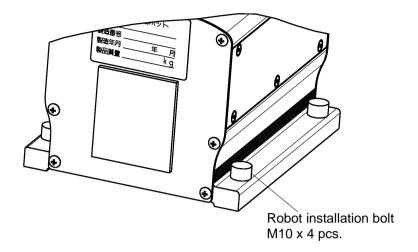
Robot installation bolts (KHL-500, KHL-600, KHL-700)
